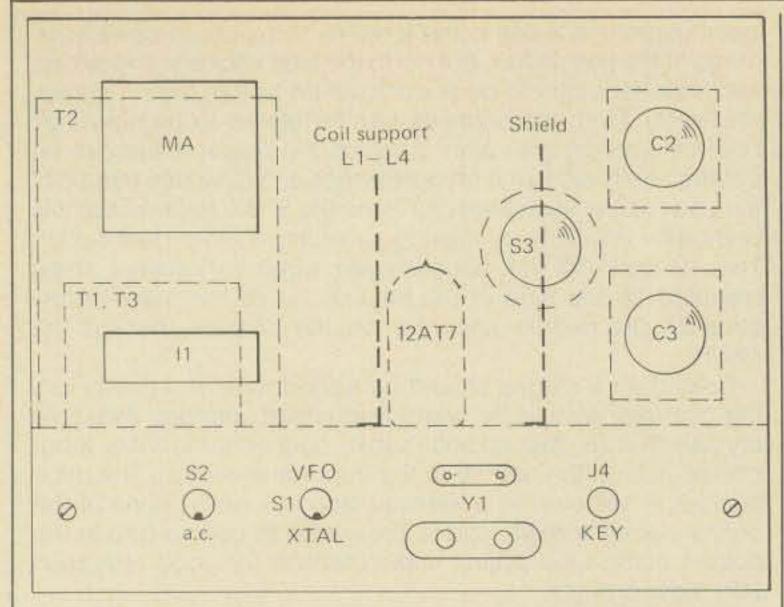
Sketch of front panel layout with partial view of components mounted behind front panel. Solid lines represent parts on the panel; dashed lines represent parts behind the panel. Panel size: 9"x7".
